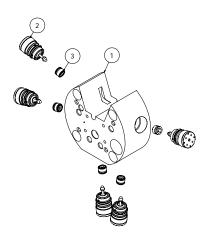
79103-00 Dual Purge Valve Manifold Disassembly
